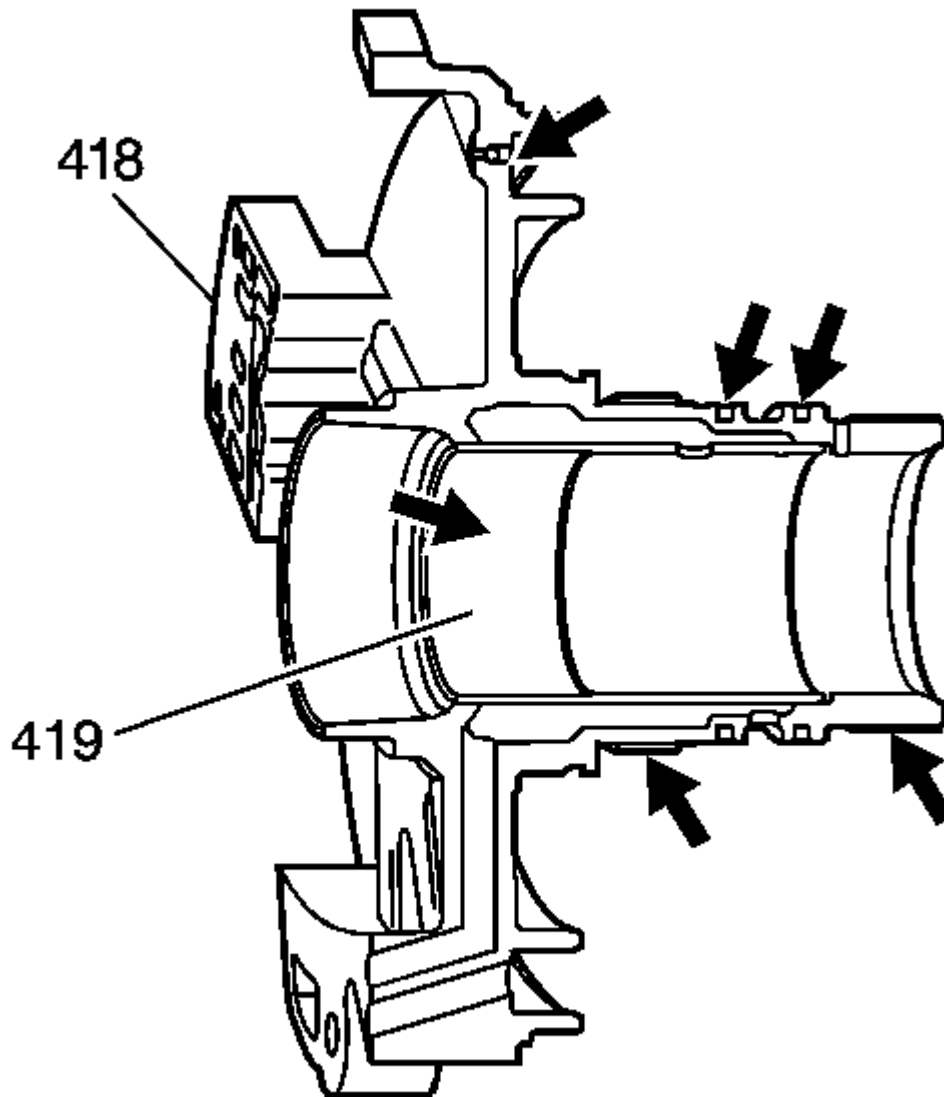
View Of Inspection Areas On Oil Transfer Sleeve
